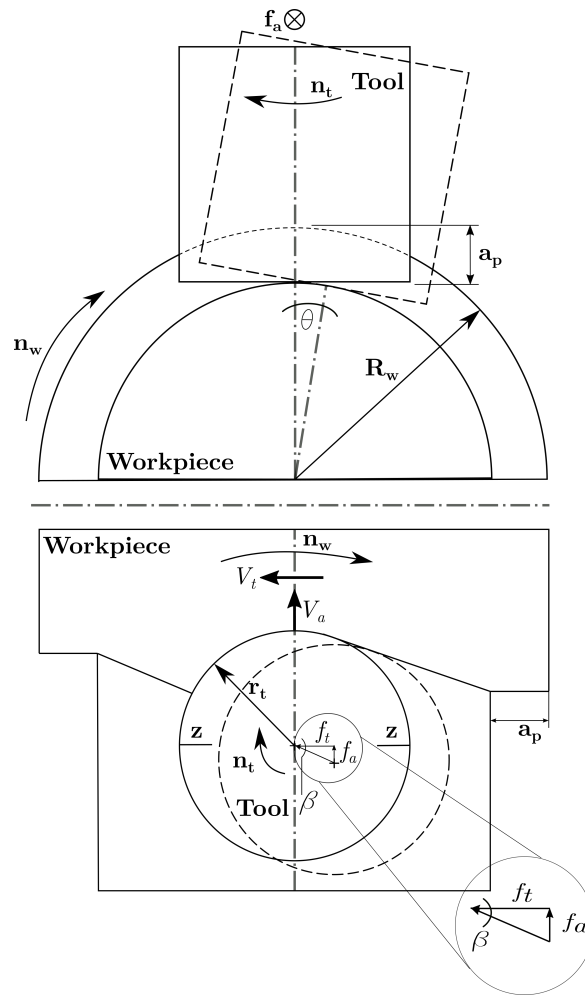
Kinematic in turn-milling operations. (R_w) Workpiece radius, (n_w) Workpiece rotational speed, (r_t) Tool radius, (n_t) Tool rotational speed, (f_a) Axial feed, (a_p) Depth of cut, (z) Number of cutting edges.
